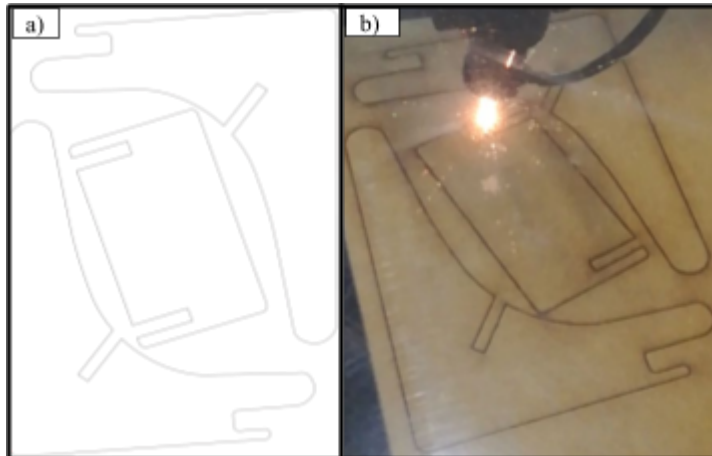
a) Tablet holder model b) Tablet holder being laser cut
